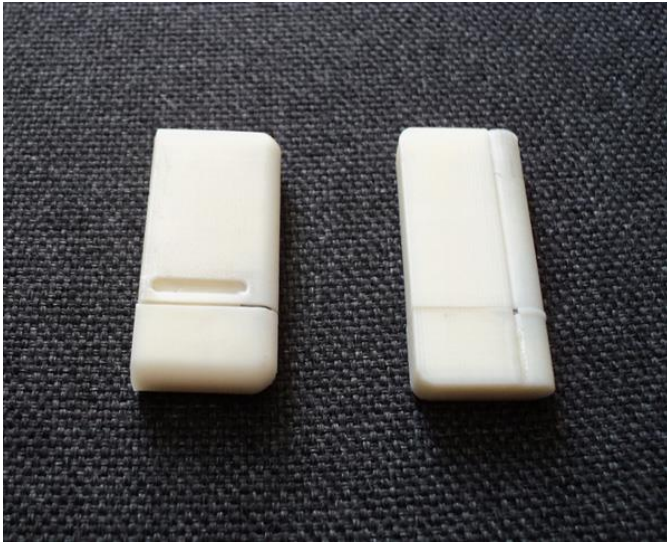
DO-RA.uni enclosure prototypes constructed in a 3D printer
